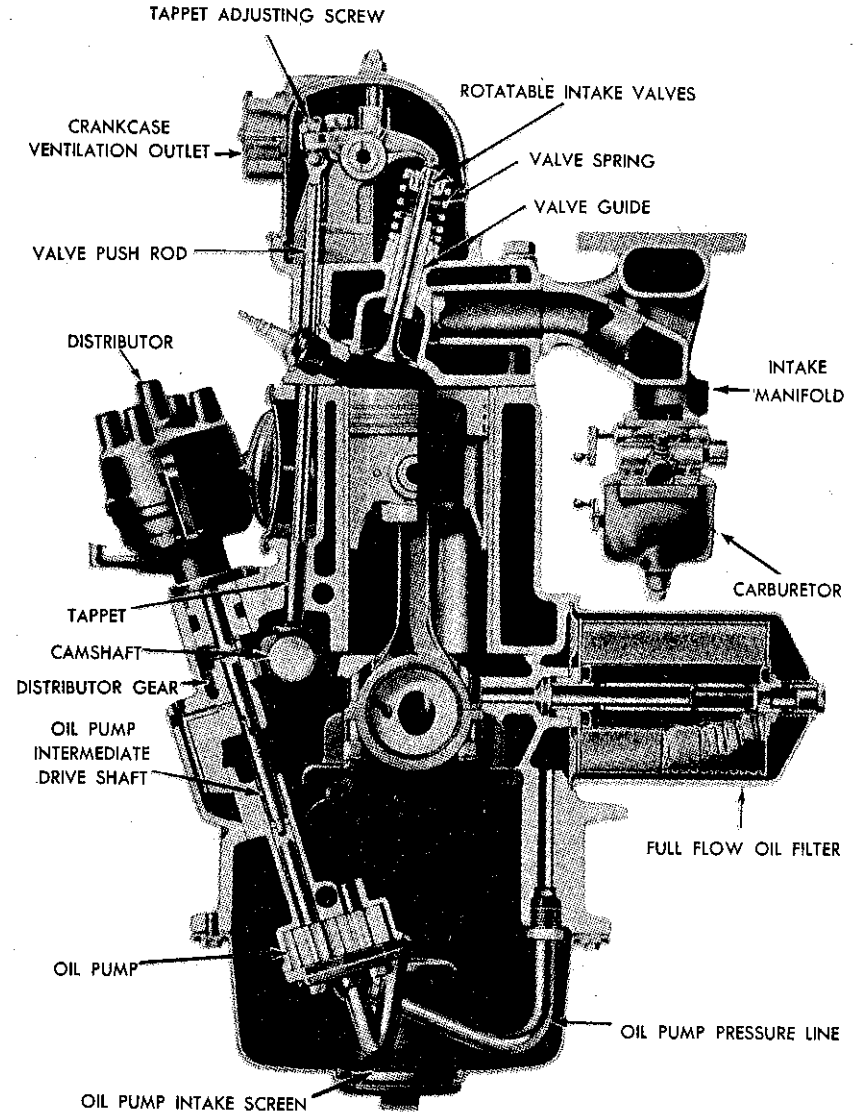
Cross Section of Ford 134 and 172 Cubic Inch Four Cylinder Overhead Valve Industrial Engine
